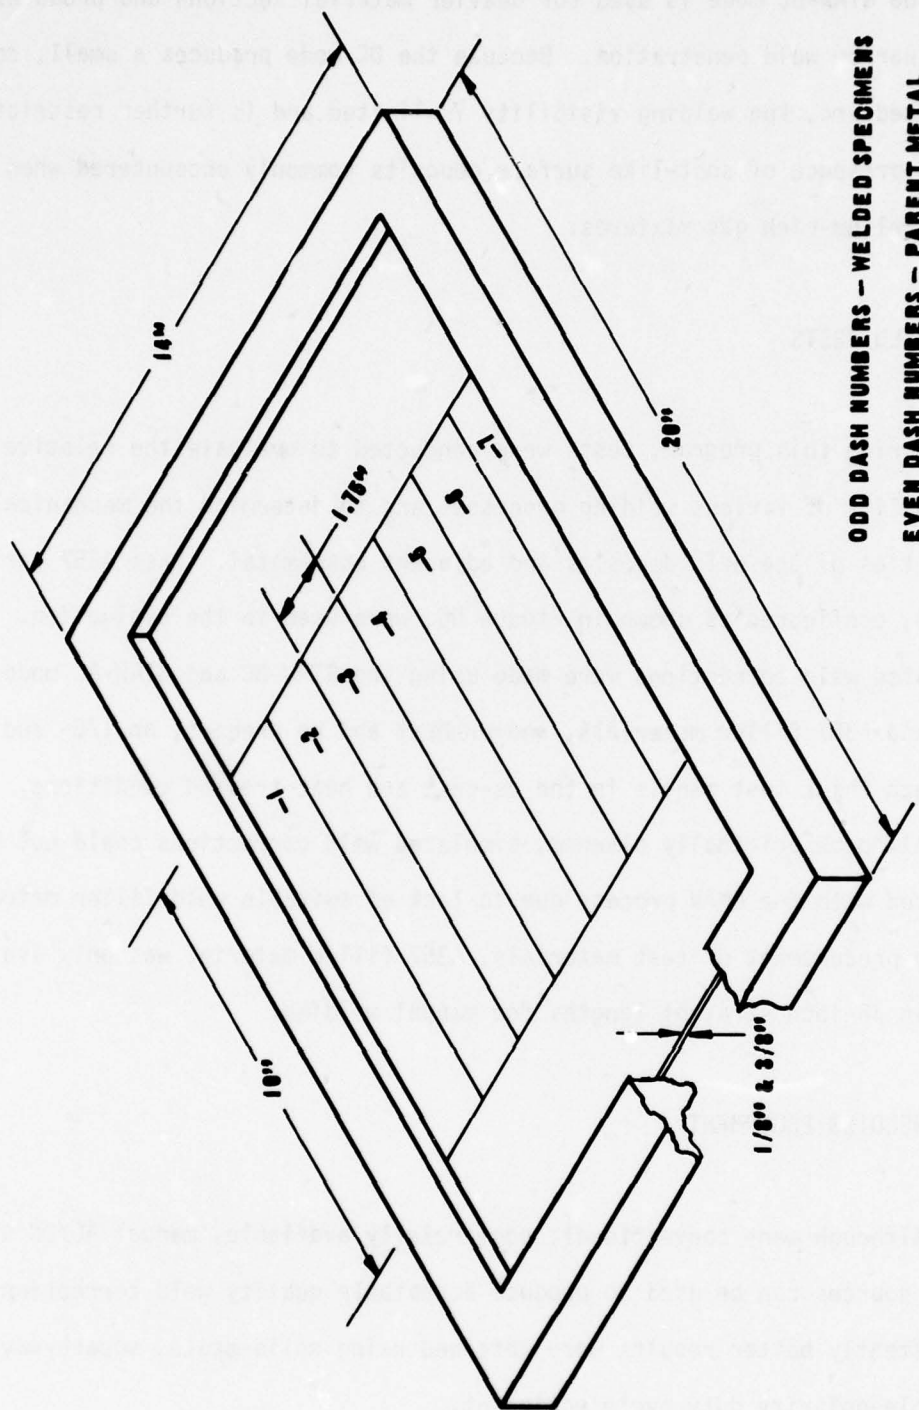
WELD TEST PANEL CONFIGURATION
